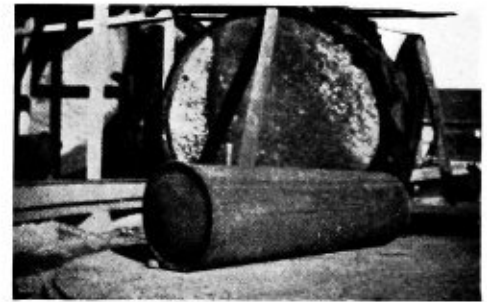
Tank No. 3. Oxy-Acetylene Welded Tank After Test with Head Bulged Out
